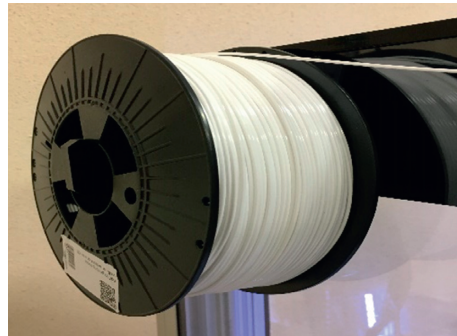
Detail of the printer: wire of PETG used for the 3D printing process.
